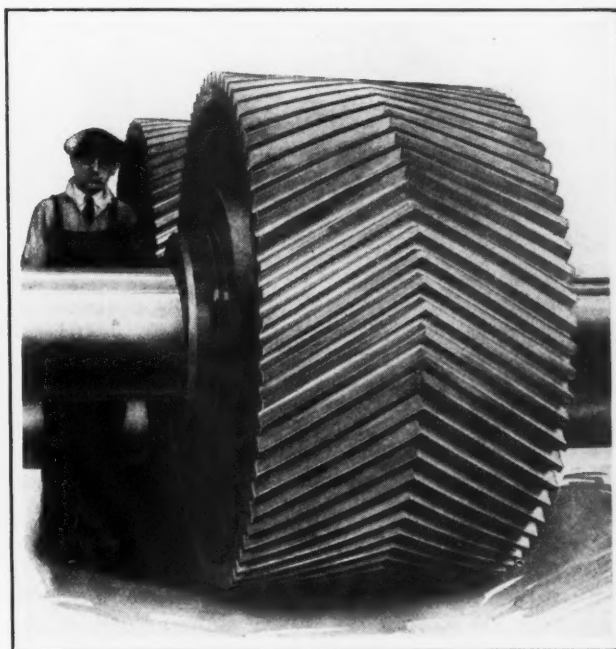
A Set of Double Helical Gears for a Tube Piercing Mill
